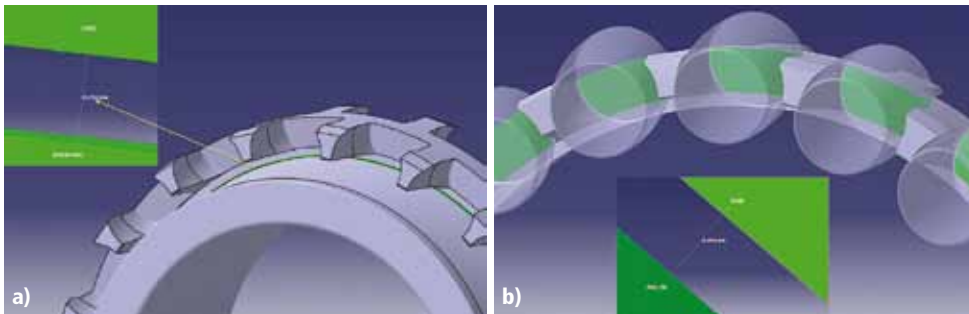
Clearance between: (a) cage and inner ring; (b) cage and rollers.
